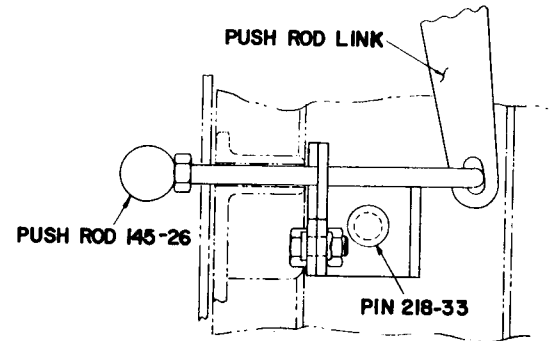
(0116B5046-0) Side View of Drawout Mechanism Padlock Device
